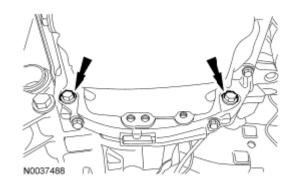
Locating Oil Pan-To-Bellhousing Bolts Courtesy of FORD MOTOR CO.
